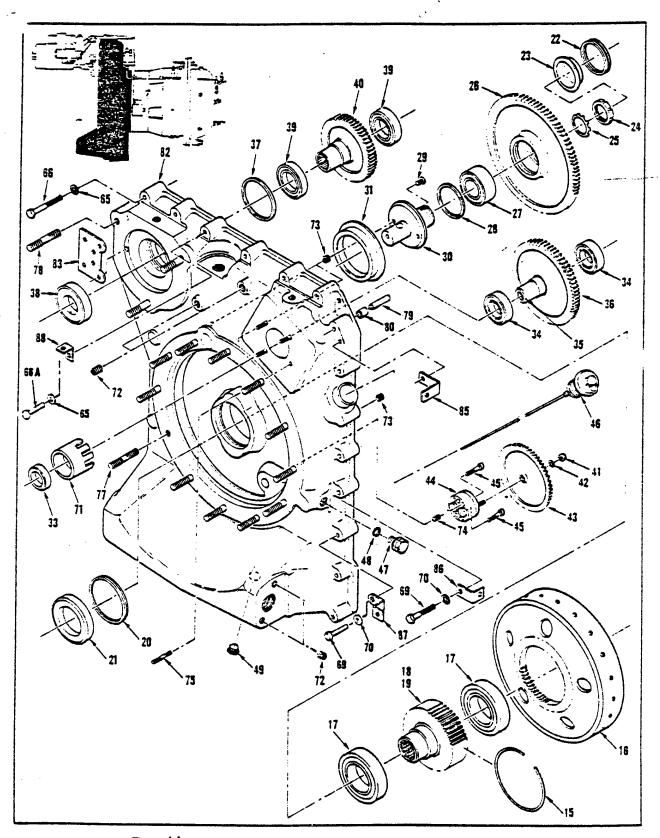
Gear Reduction and Accessory Drive Assembly (Sheet 1 of 2)
